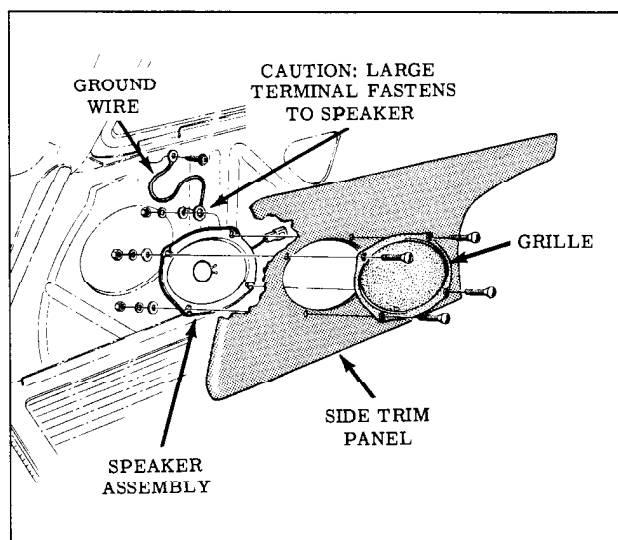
Rear Seat Speaker (35 & 45 Styles)
